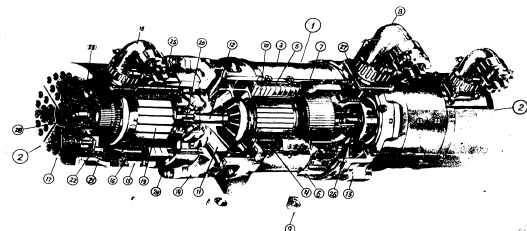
BA-3H Motor Generator Unit Cut-Away View.
